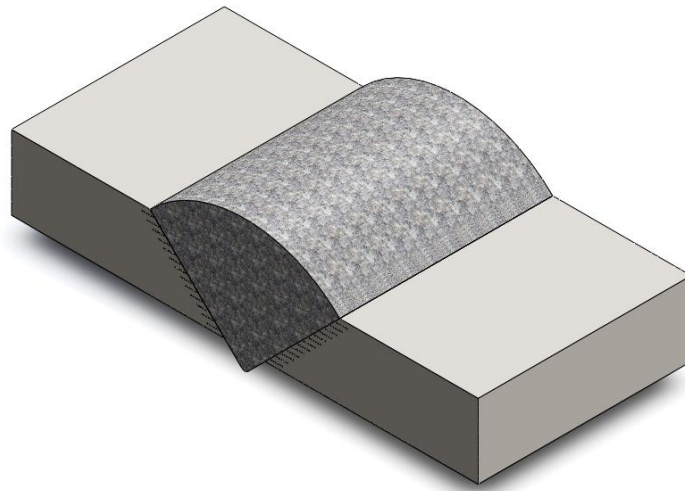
Isometric view of the as-received weld showing the graphitized HAZ
